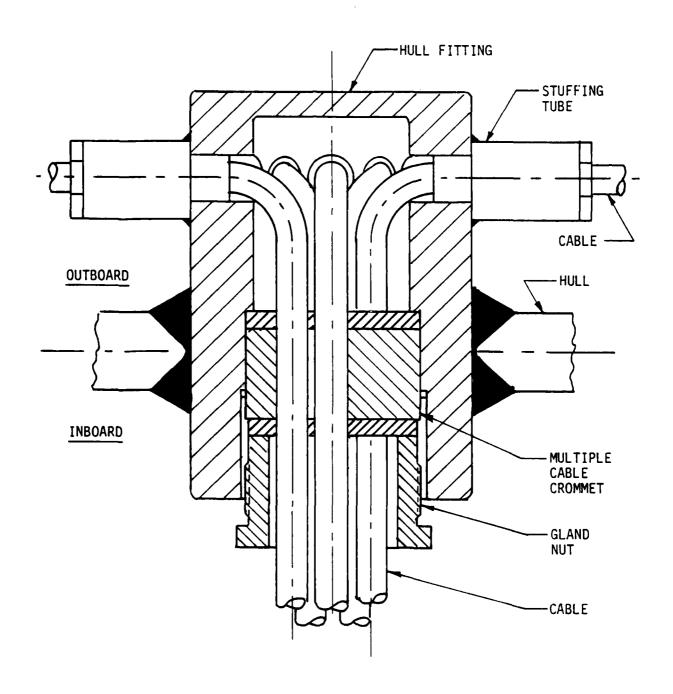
Multiple stuffing tube type cable hull penetrator.
